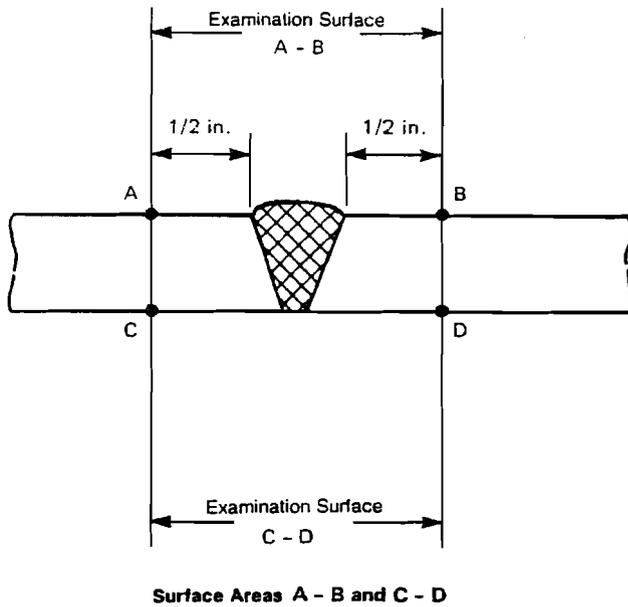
DISSIMILAR METAL WELDS
